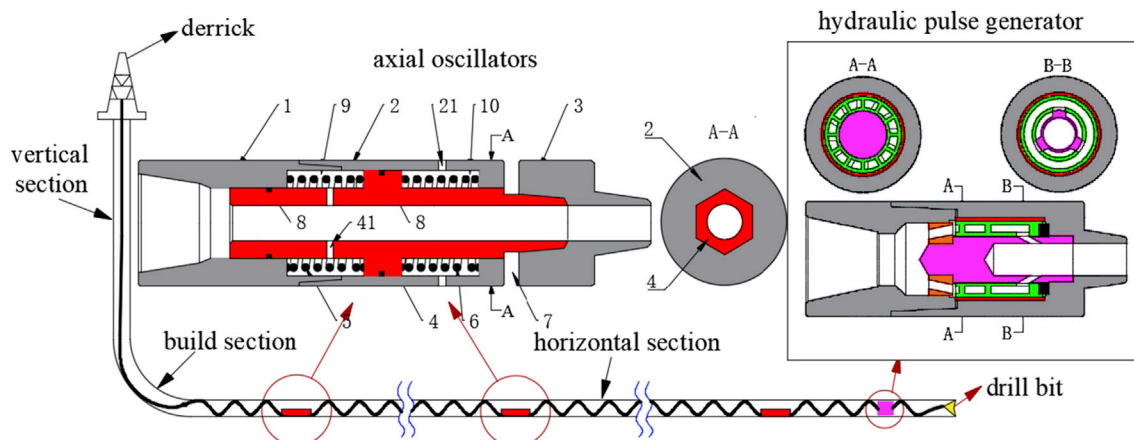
Schematic diagram of earthworm-like drilling. Parts of axial oscillator: 1-upper sub; 2-sleeve; 21- low-pressure hole; 3-lower sub; 4- center shaft; 41-high-pressure hole; 5,6-disc spring; 7- moving clearance; 8-seal; 9-high-pressure chamber; 10-low-pressure chamber.
